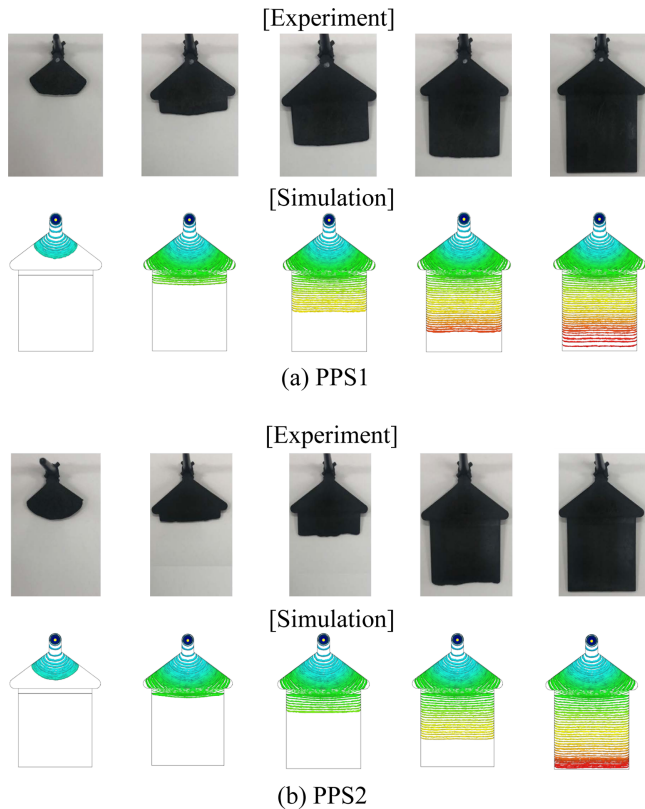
Fill Pattern in injection molding of rectangular shaped Specimen.
